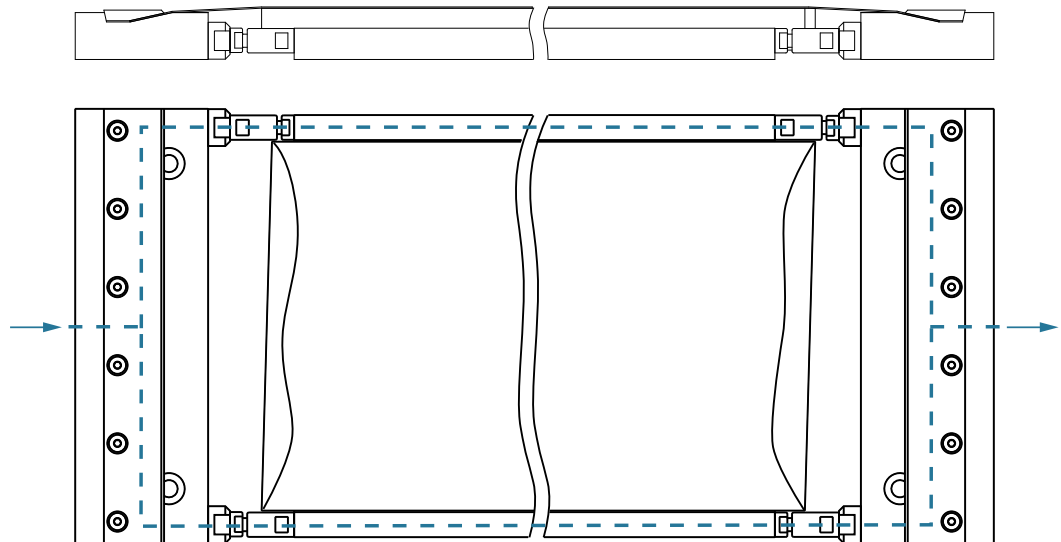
Secondary section cooling for motors of sizes 1FN3050 ... 1FN3450 with combi distributors (side and top view)
